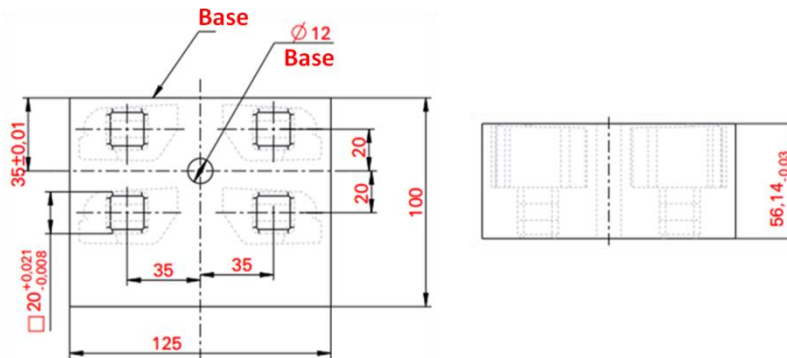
The workpiece with inscribed contour of the part "Insert".
